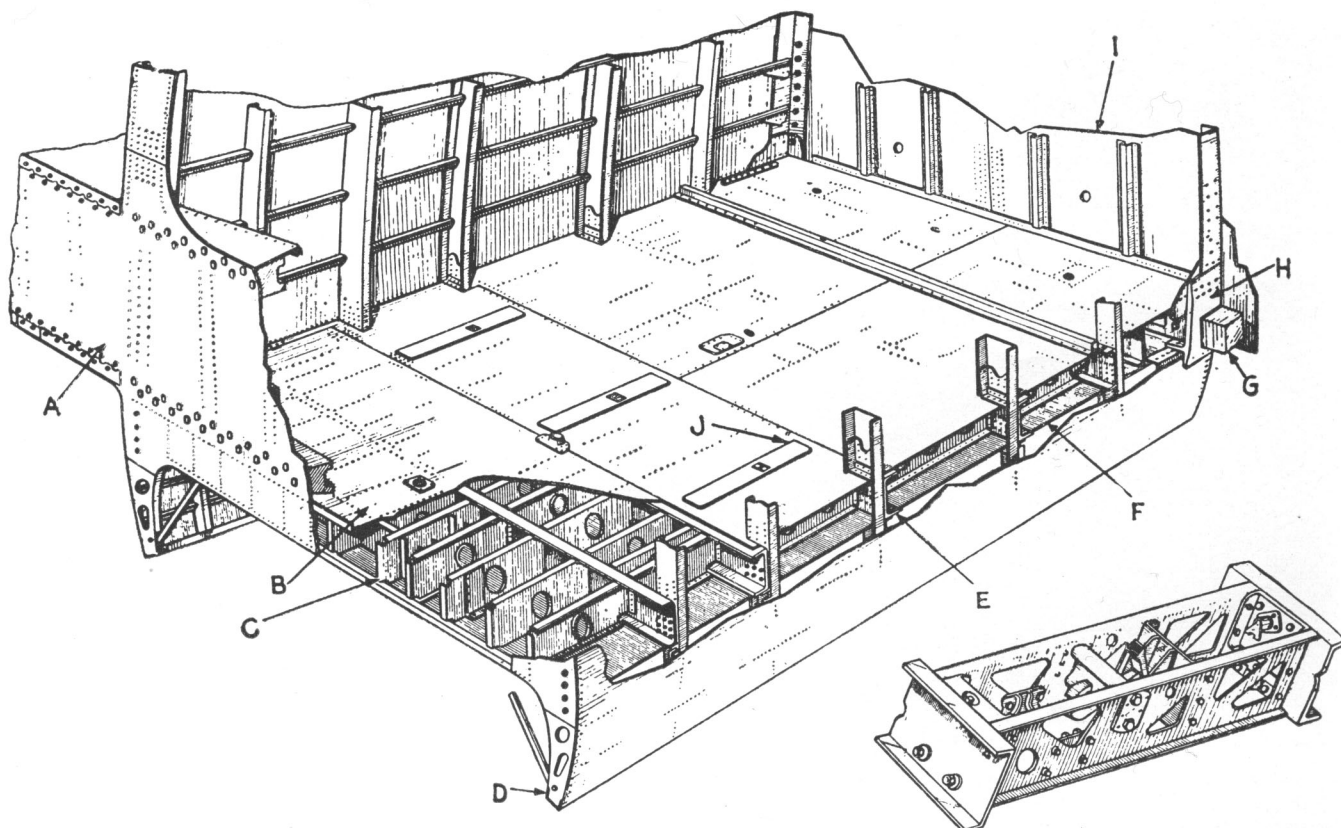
Avro Lancaster floor construction over the bomb bay with front spar at A; top skin of floor at B; typical intercostal at C; bomb-bay door hinge channel at D. A typical floor cross member is shown at E and lower skin floor at F. The rear spar bottom boom is at G; longeron at H; rear spar at I. The detail sketch at the lower right shows the bomb carrier housing below point J.
